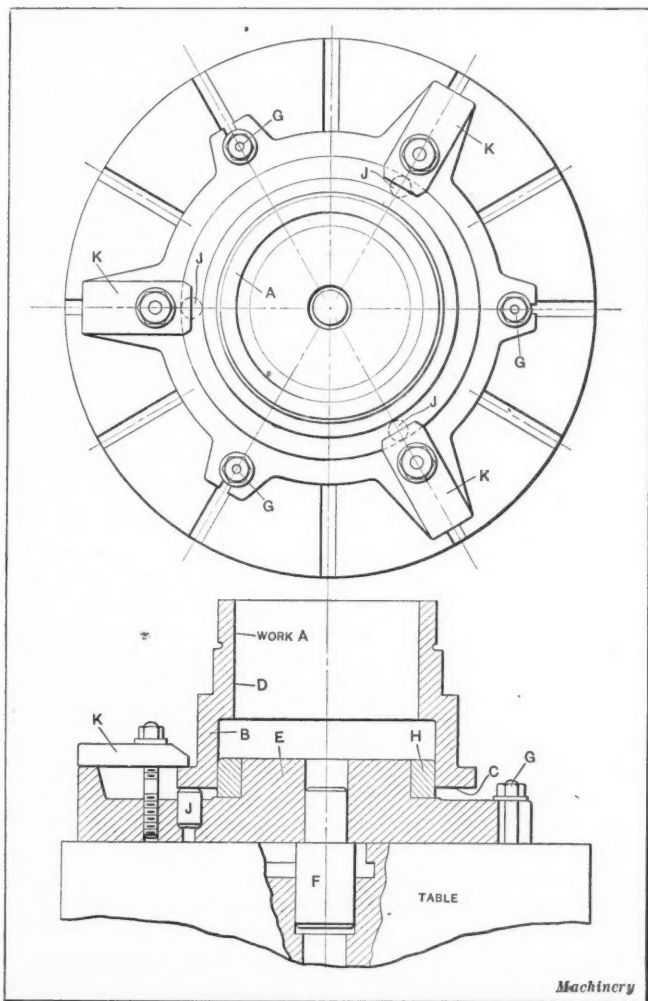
Fixture for performing Final Machining Operations on Partially Finished Casting A
